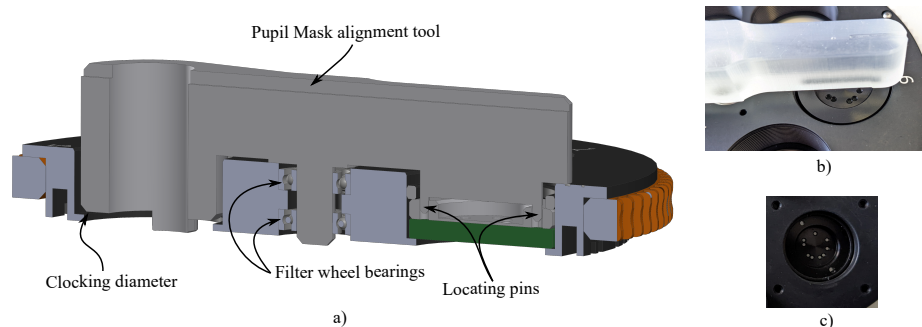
Mask Alignment Jig. a) Cross-section of the CAD model of the alignment tool b) Testing of the alignment tool c) Pupil Mask installed
